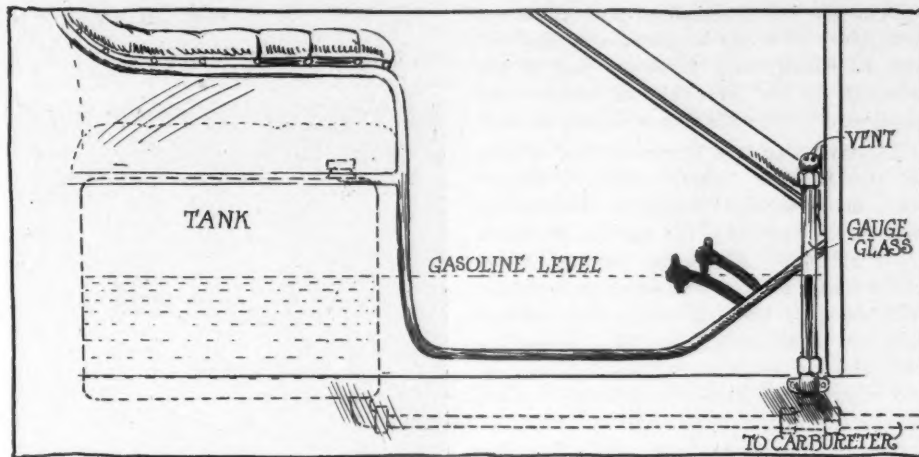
SHOWING HOW A SIMPLE GASOLINE GAUGE CAN BE FITTED TO THE CAR
